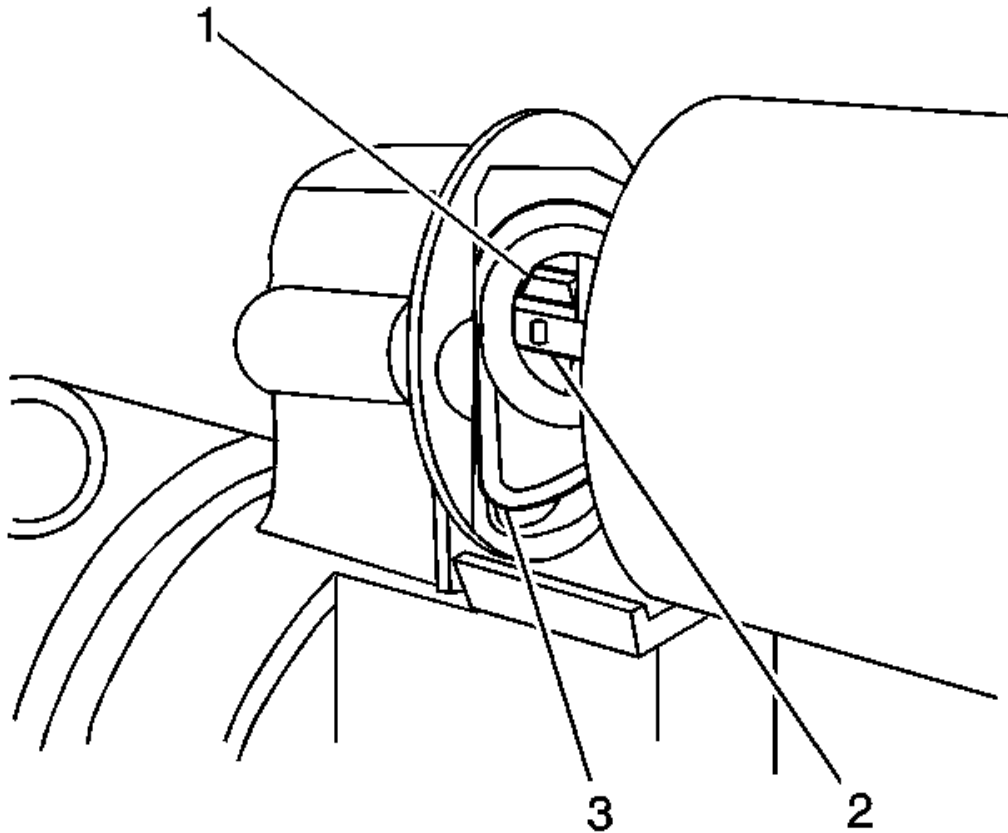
View Of Drive Gear Lever, Solenoid Plunger Loop & Spring (6.6L (LB7) Engine)
